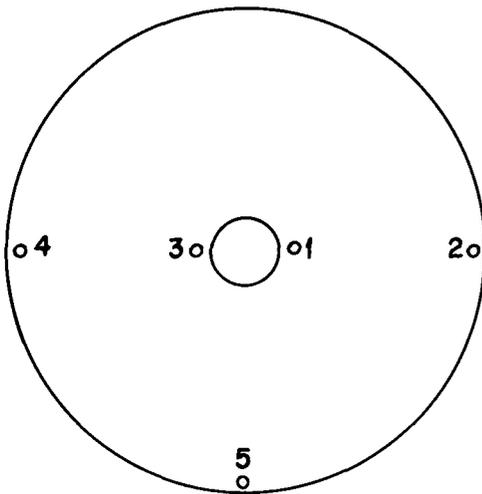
Plan view of molybdenum test section disk. ID, 0.75 in.; OD, 5 in.; thickness, 0.50 in.; inner probe hole radius, 0.500 in.; outer probe hole radius, 2.375 in.; probe hole diameter, 0.070 in.
